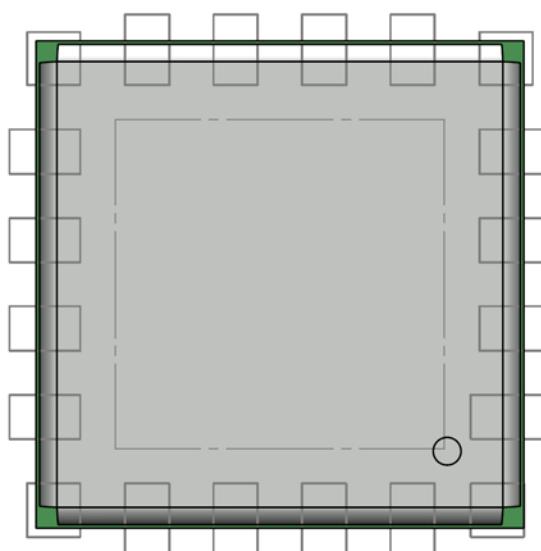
MODULE HOSTED ON FOOTPRINT
